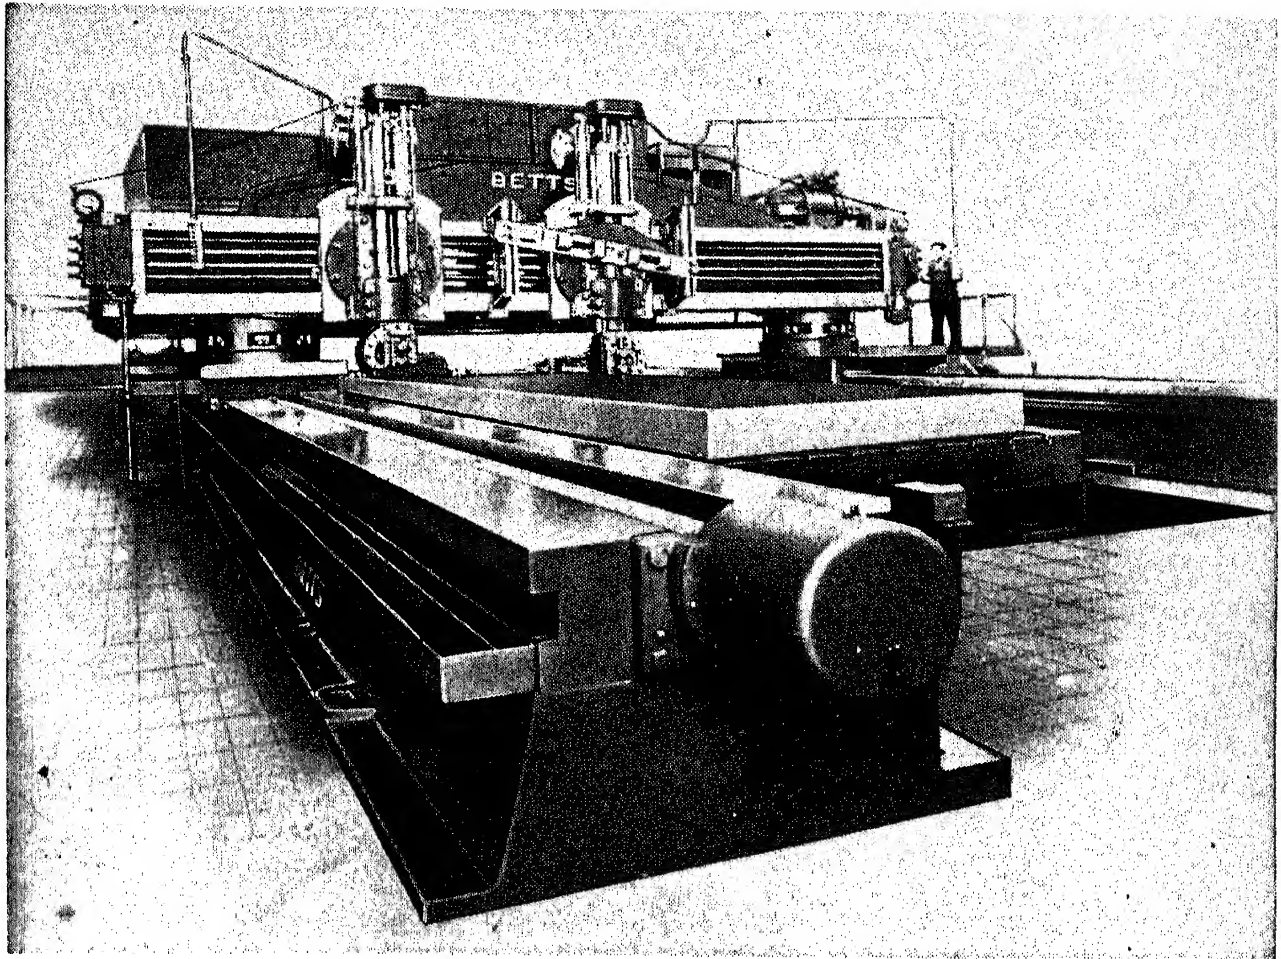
A pit planer. (Courtesy Consolidated Machine Tool Corp.)
